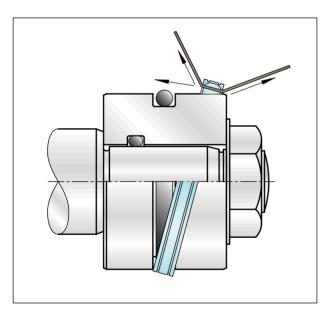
Fitting the seal ring onto the O-Ring in the groove, using a thin plastic strip
